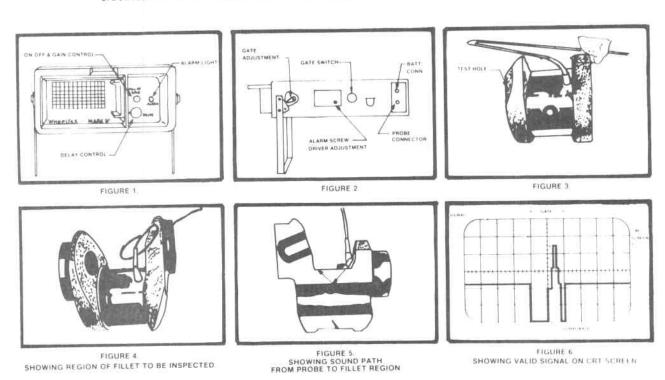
CRANKSHAFT ULTRASONIC INSPECTION PROCEDURE.
